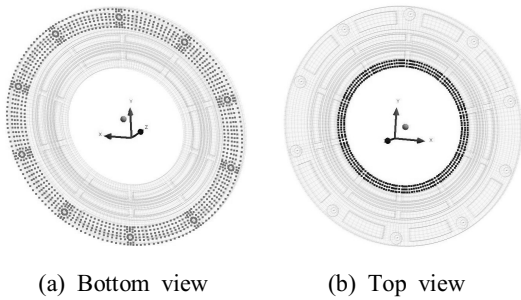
Contact Nodes of ISU Fixing Plate: (a) with Base (b) with Bearing Housing
